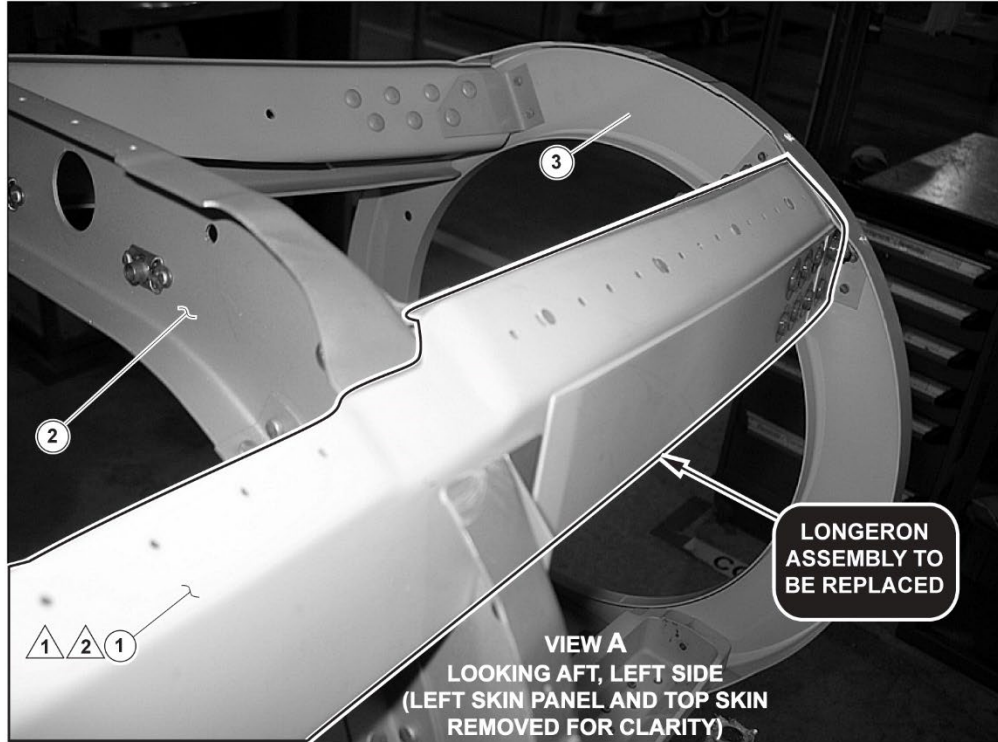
Installation of Drill Plate on Aft Fuselage (Sheet 2 of 2)
